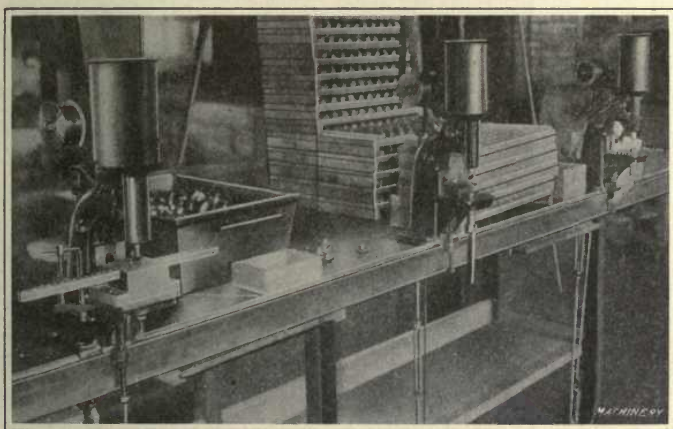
Grant Riveting Machines used In riveting Needle In Percussion Needle Plug
